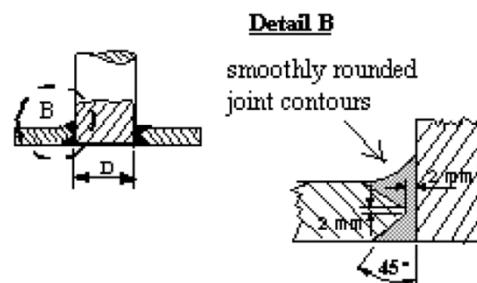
Welded joint between rudder stock and coupling flange for small stock diameter
